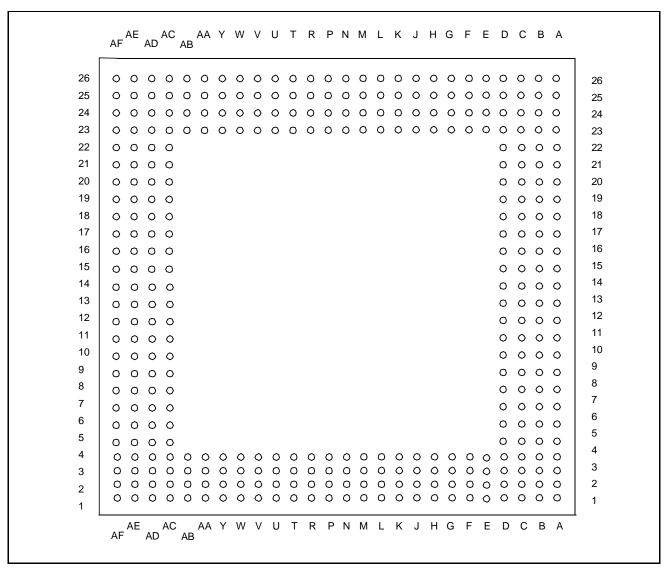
352L HL-PBGA Package Diagram (Bottom View)
